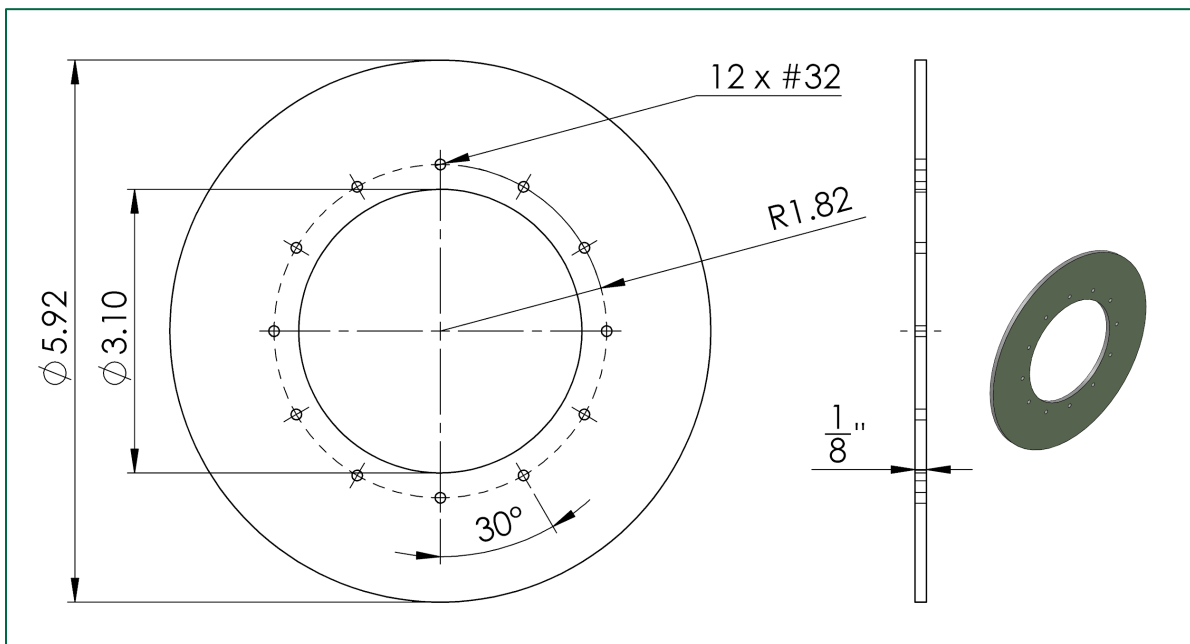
Lower centering ring design, with motor retainer hole pattern.
